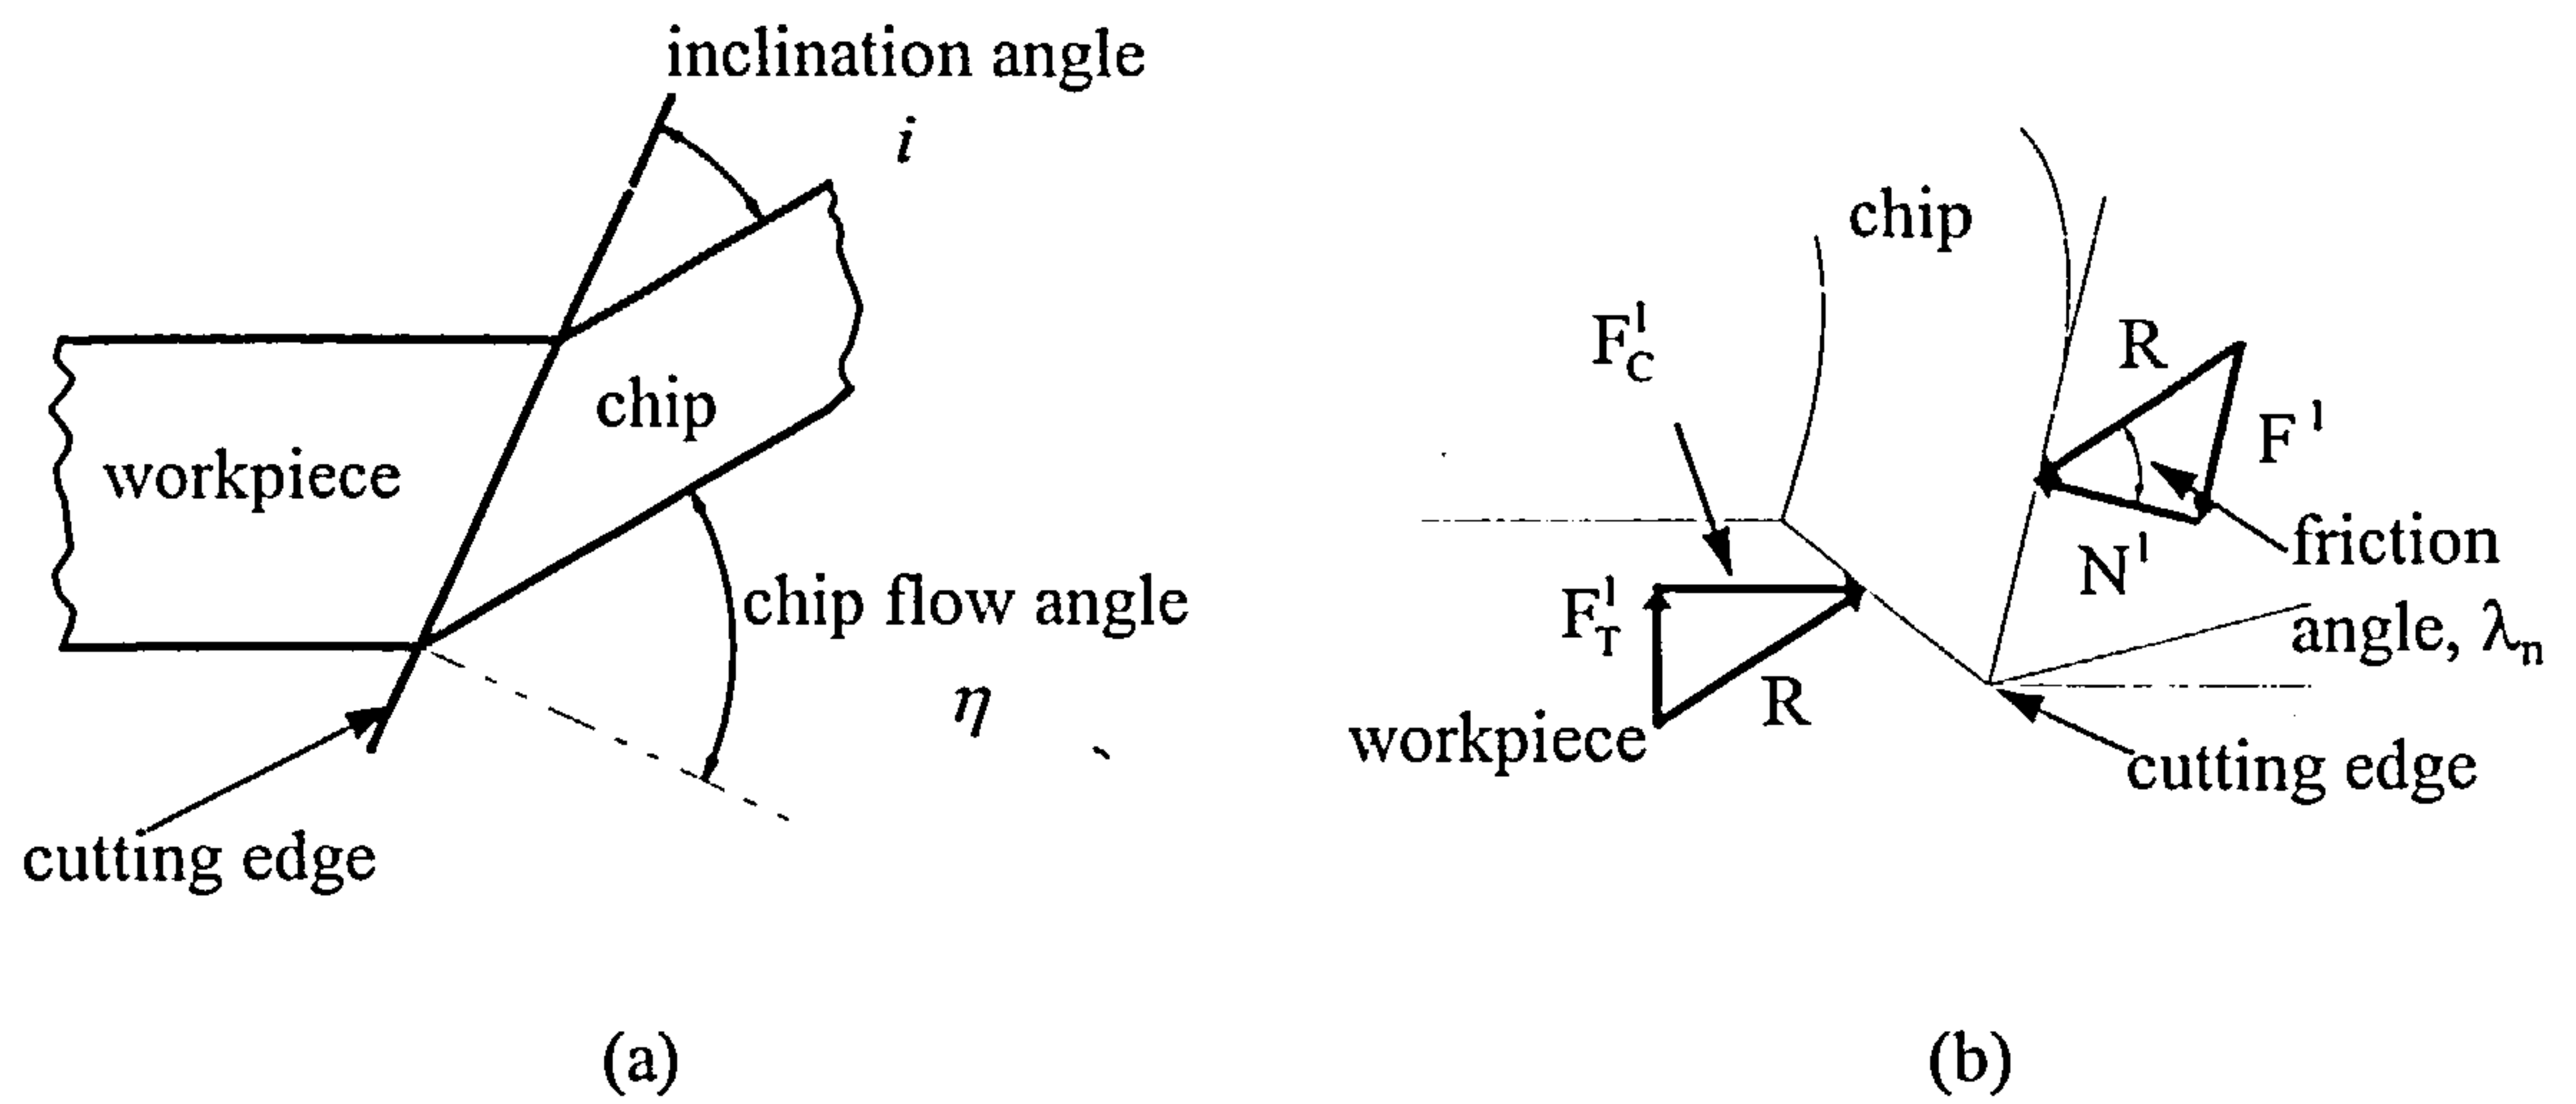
(a) Plan view of cutting process showing angles i and η (b) View of forces in plane perpendicular to cutting edge and workpiece showing angle λ .
